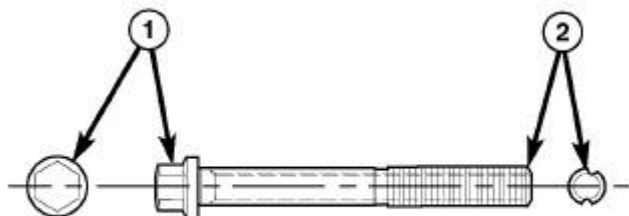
WHEEL ALIGNMENT ADJUSTMENT BOLT
